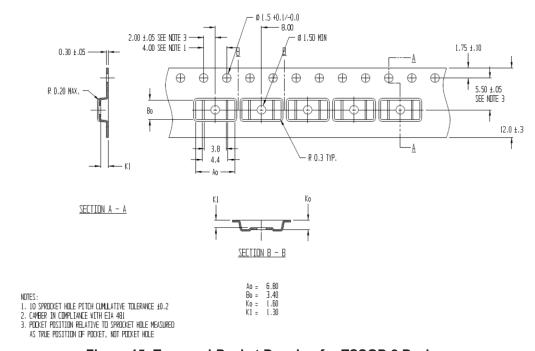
Tape-and-Pocket Drawing for TSSOP-8 Package
